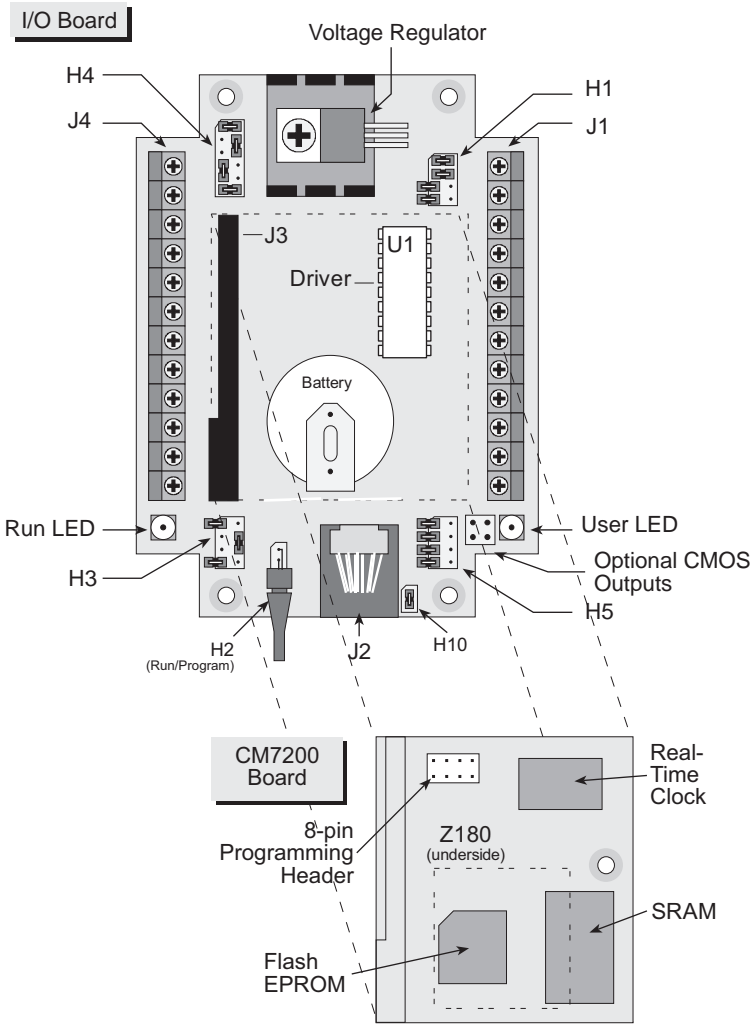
PK2300 Component Layout (Top View, Case Removed)
